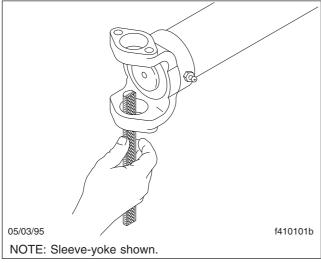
, Remove Burrs from a Full-Round Yoke Cross-Hole
